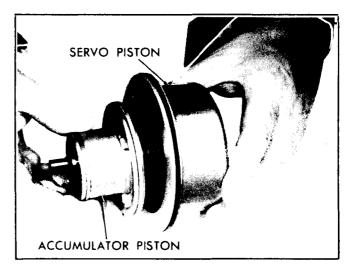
E-96 Removing Accumulator Piston From Rear Servo Piston
